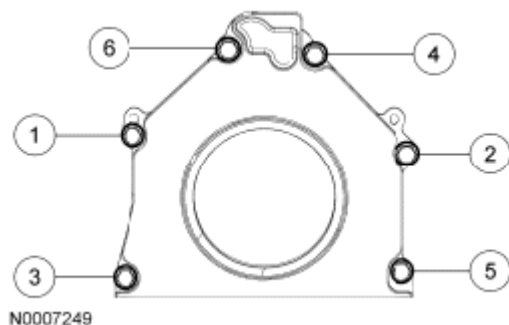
Identifying Crankshaft Rear Seal Retainer Plate Bolts
